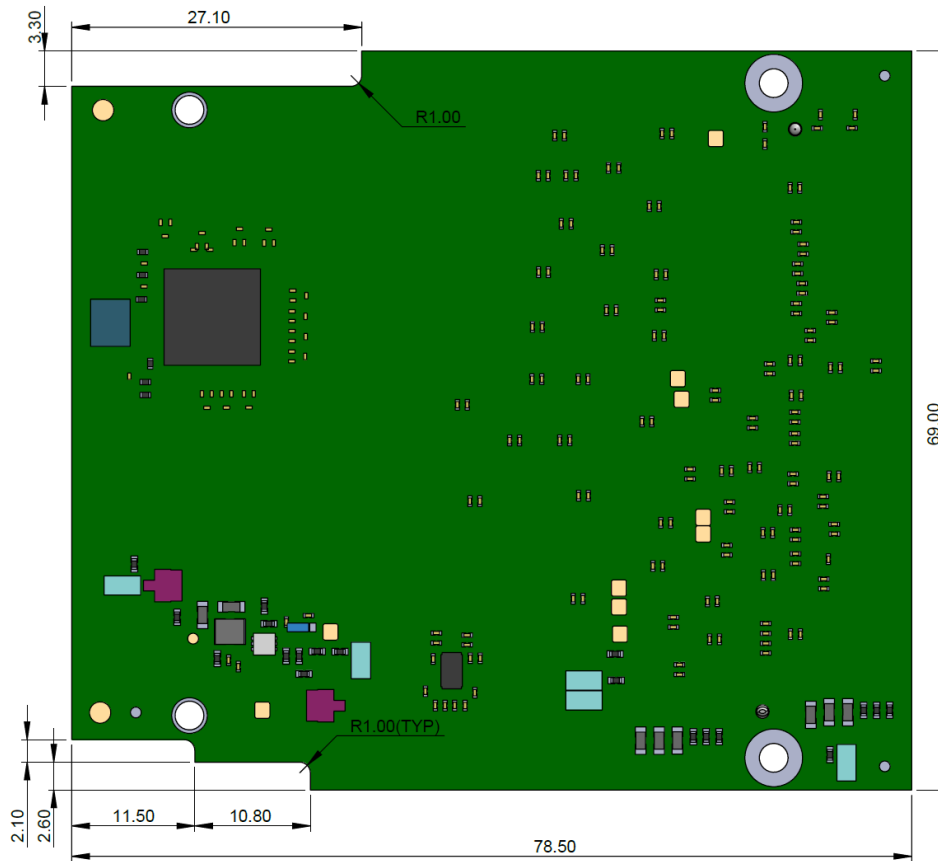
FMC/FMC+ Loopback Test Module Mechanical dimension – Top View
